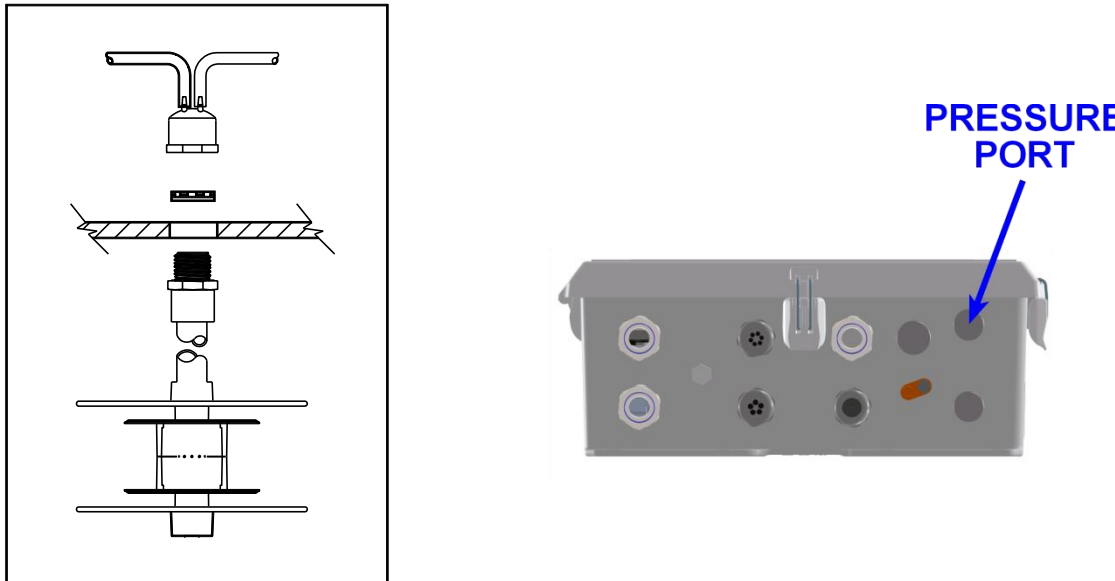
Install Pressure Port at Bottom of DCP Enclosure
